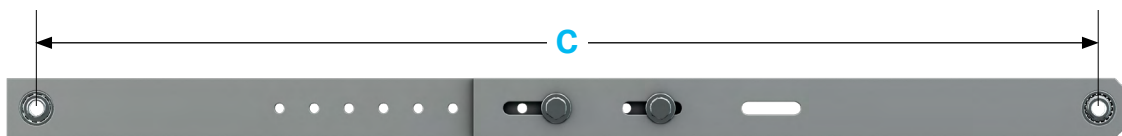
"C" is the distance between the bearings on each end of the operator link assembly.
